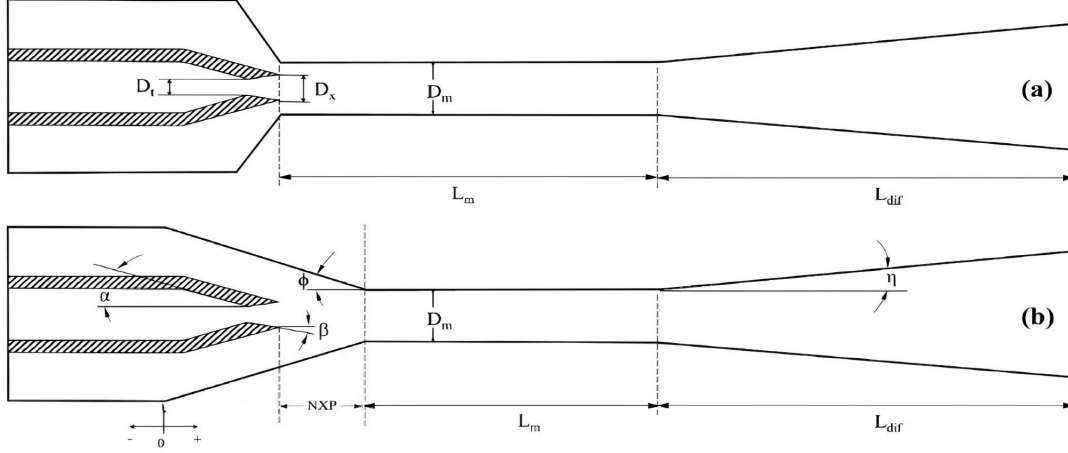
(a) Constant area mixing (CAM); (b) constant pressure mixing (CPM) (2).
